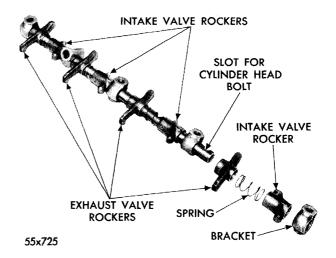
Rocker Shaft Assembly (Disassembled View)
